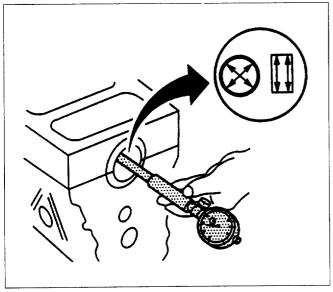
Measuring Crankshaft Journal Inside Diameter
